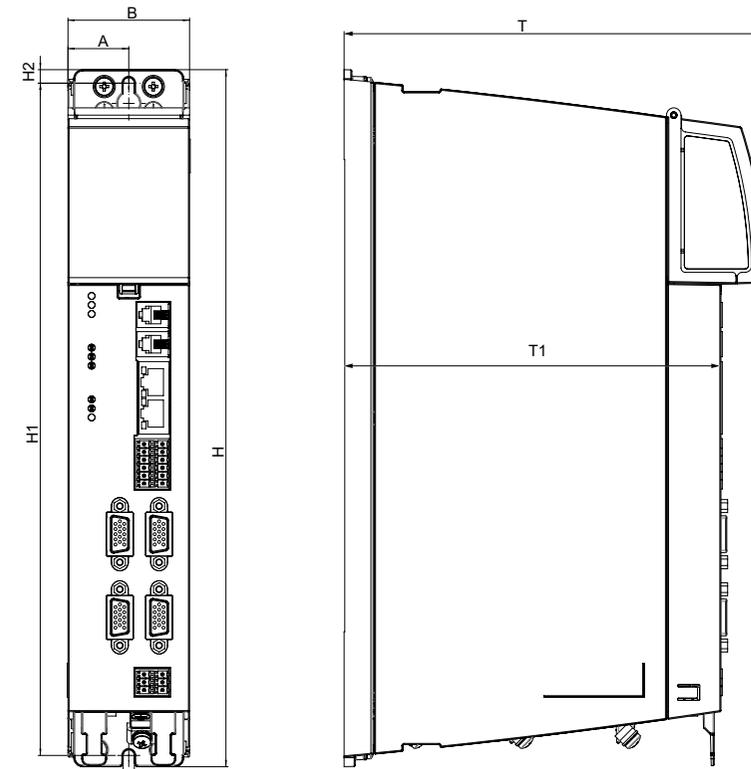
Dimensional drawing, ServoOne CM axis controller BG1 cold plate (for dimensions see Table 3.2)
